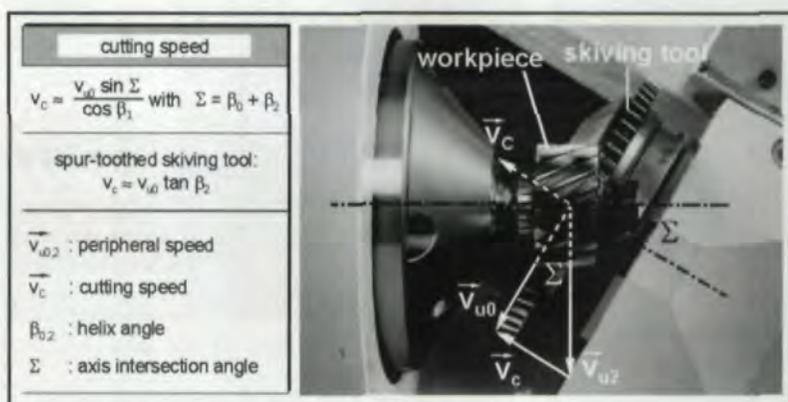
Tool-workpiece configuration in skive hobbing. Source: Pfauter.
